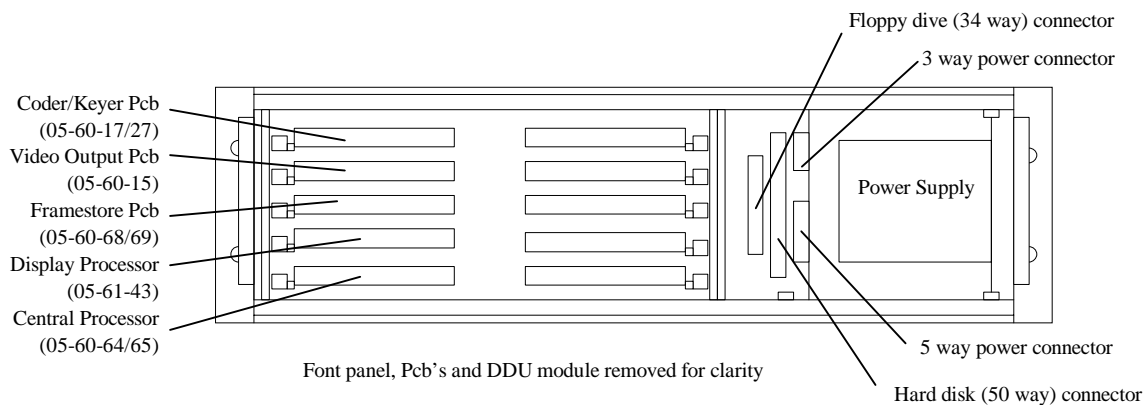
Front View of Motif with Disk Drive Assembly Removed
